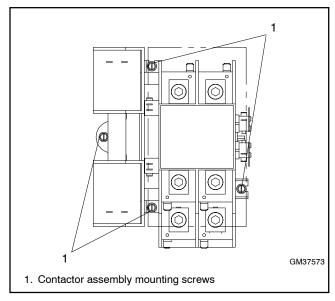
Contactor Mounting Screws, 100/200 Amp Models, Typical
